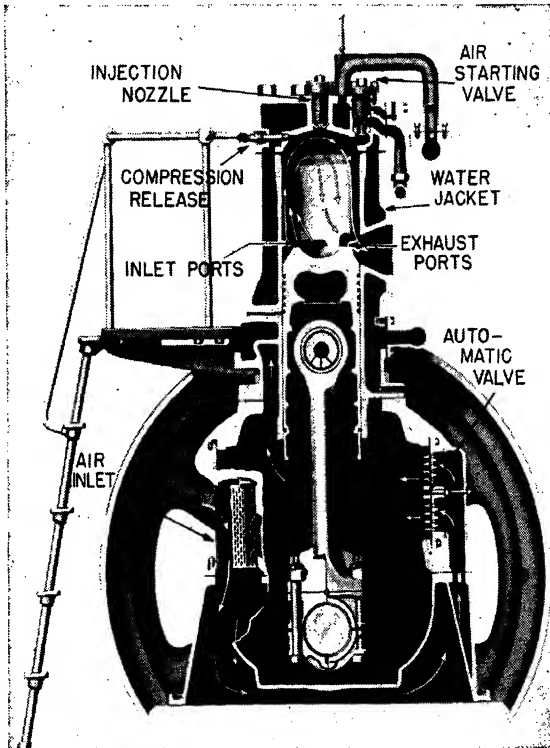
Two-cycle stationary type Diesel engine. (Courtesy Fairbanks Morse & Co.)
